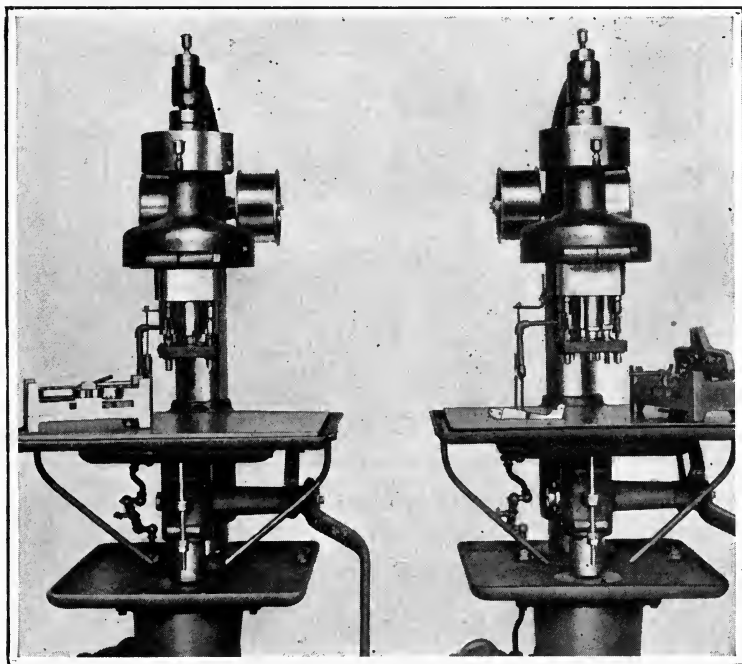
Multiple Drilling Machines used in Couples for Drilling, Reaming, and Counterboring Holes in Floor-plate of Rifle Receivers
